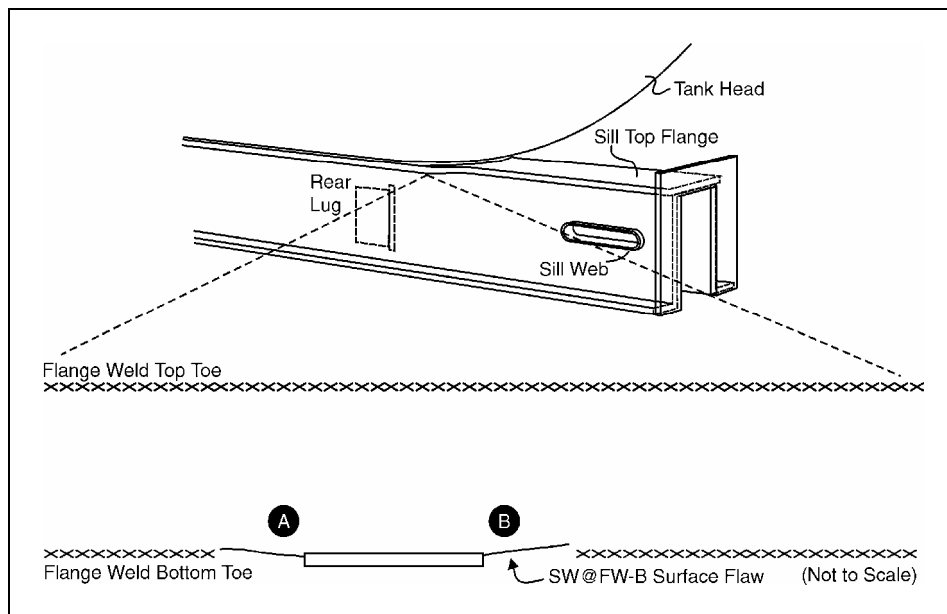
B-End Left Flange Weld Cracks and Preflaw
